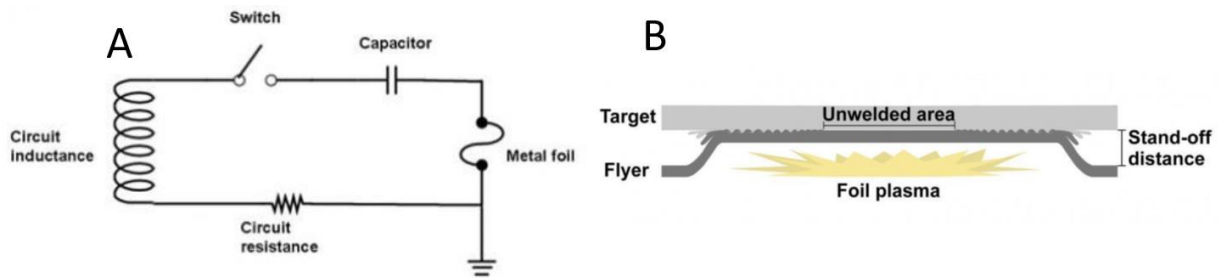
Schematic of electrically driven vaporizing metallic foils (A) and schematic of a collision welding process (B)
